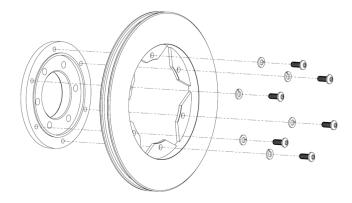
Use thread locker when assembling the 6 bolts and washers to each rotor sub-assembly.
